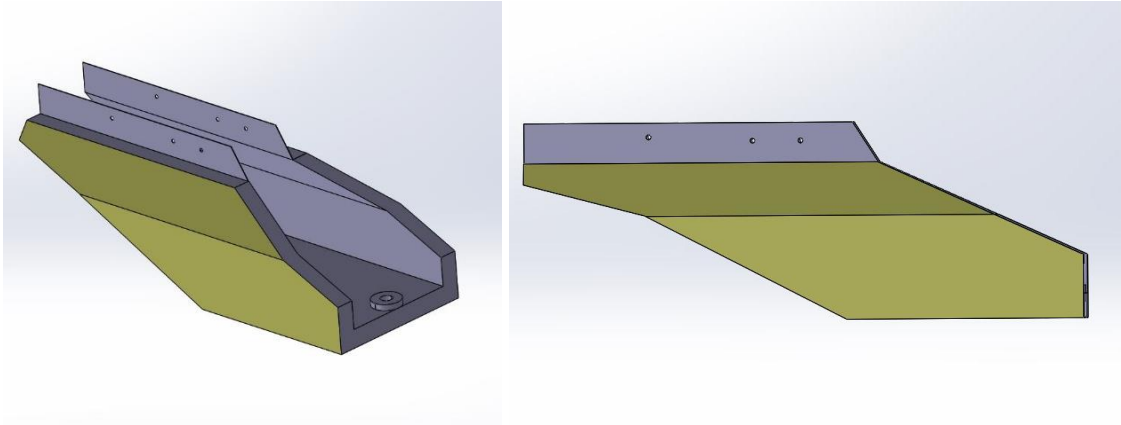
Fuselage: Isometric View on the left and Side view on the right
